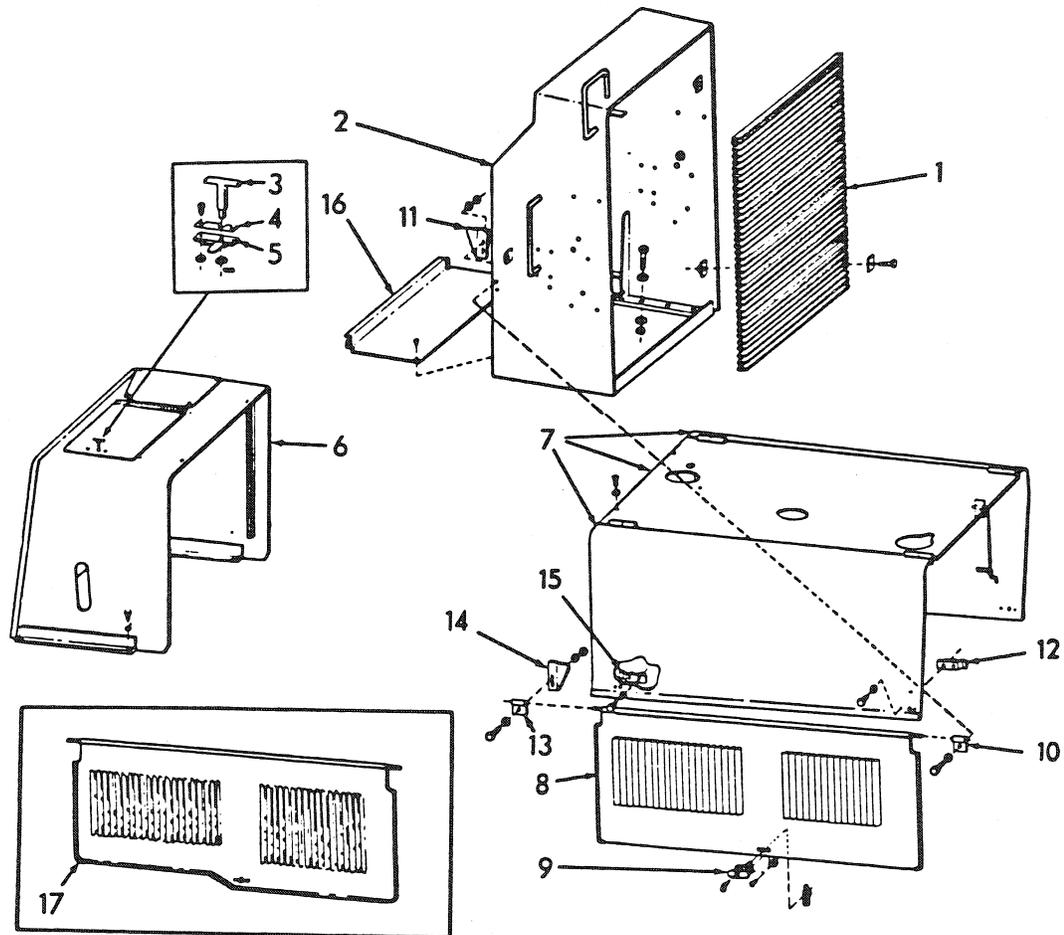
GRILL, HOOD & SIDE PANELS (FR10 & FR12)
